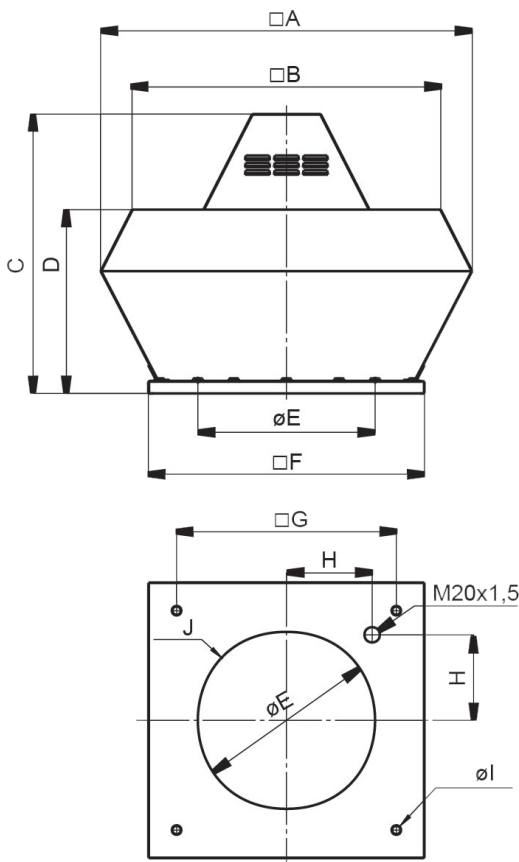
Dimensioned drawing of fans DVN/DVNI
